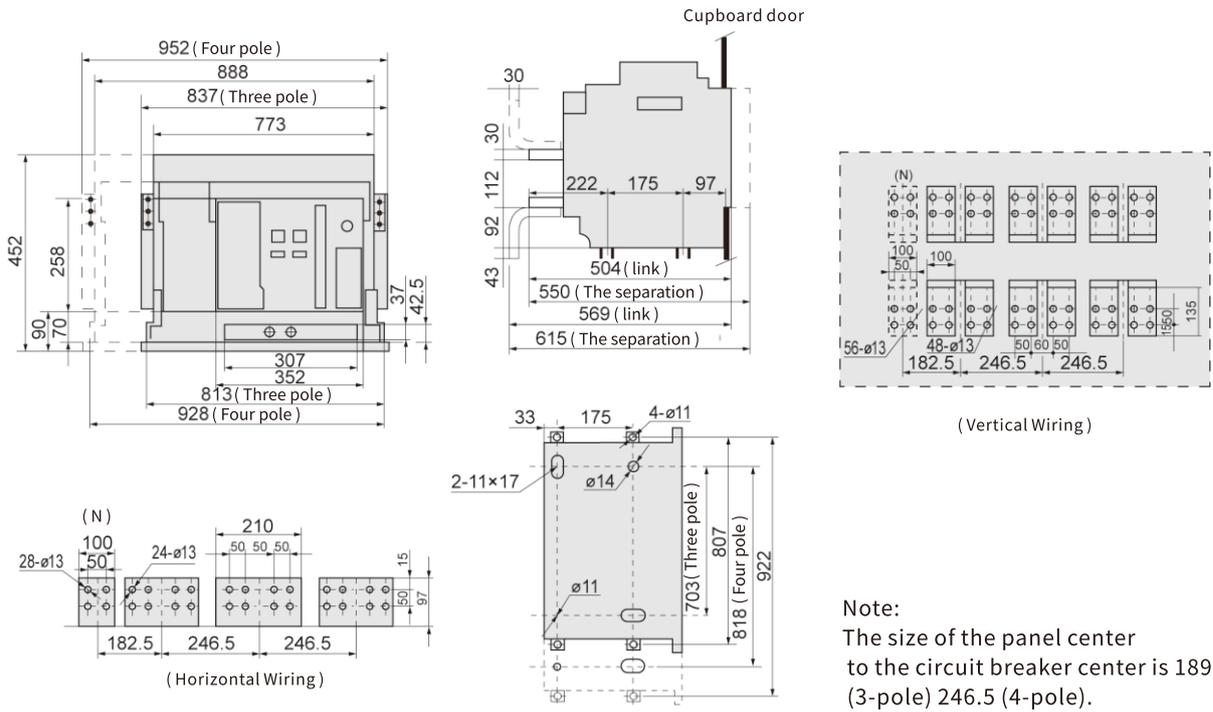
Outline and installation dimensions of drawout type circuit breaker (EKA1-6300, 6300/4 In=4000, 5000)
